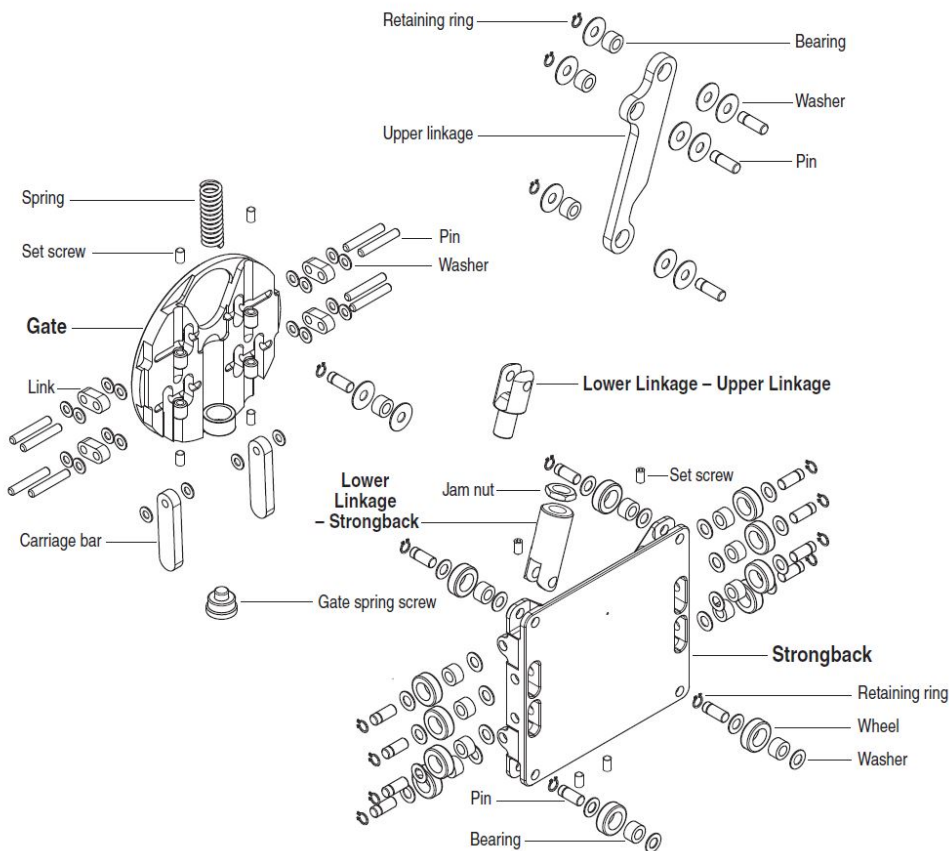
STRONGBACK & GATE ASSEMBLY DRAWING
